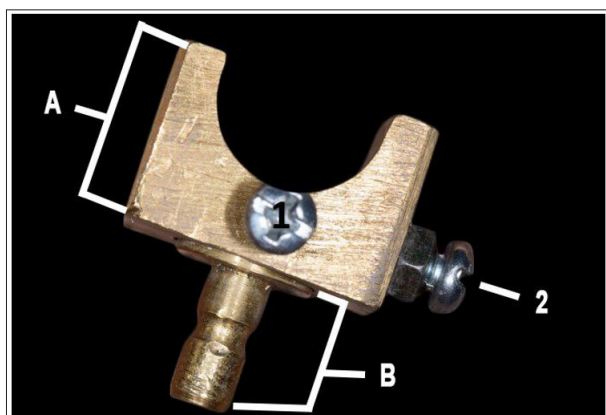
Specially Designed Tool housing Showing: 2 Pieces' Holder (A, B) and 2 joints (1, 2)
